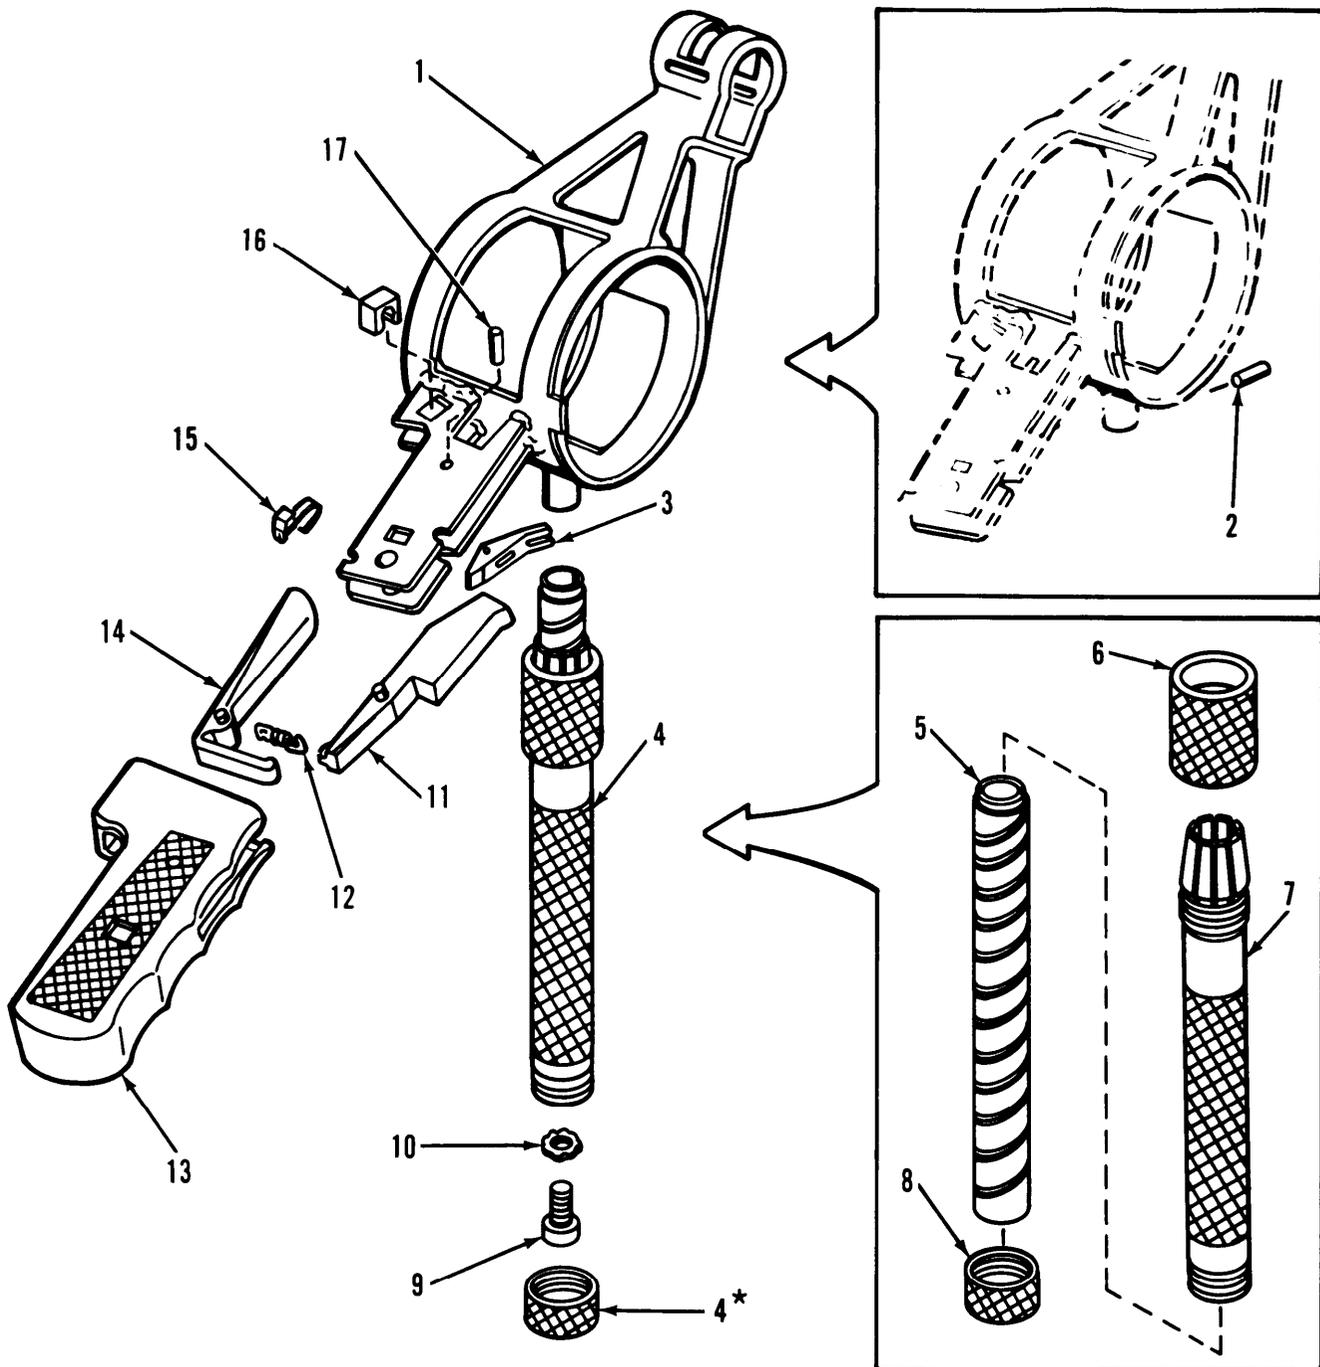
90-mm Recoilless Rifle M67 (Trigger Mechanism) and Monopod Assembly and Front Bracket Assembly
